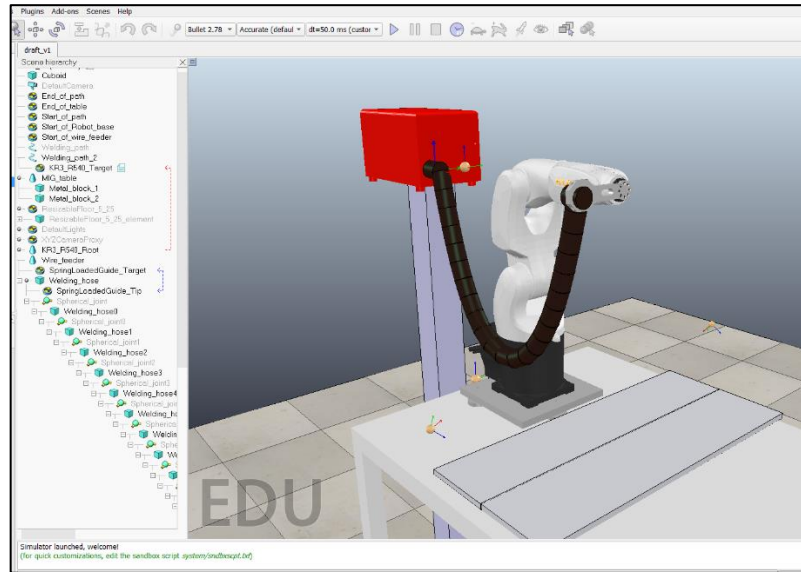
A feasibility study performed in Coppelia Sim, provided the length of 1.2 m for the robotic welding hose of the developed holistic sensor-enabled robotic welding system
